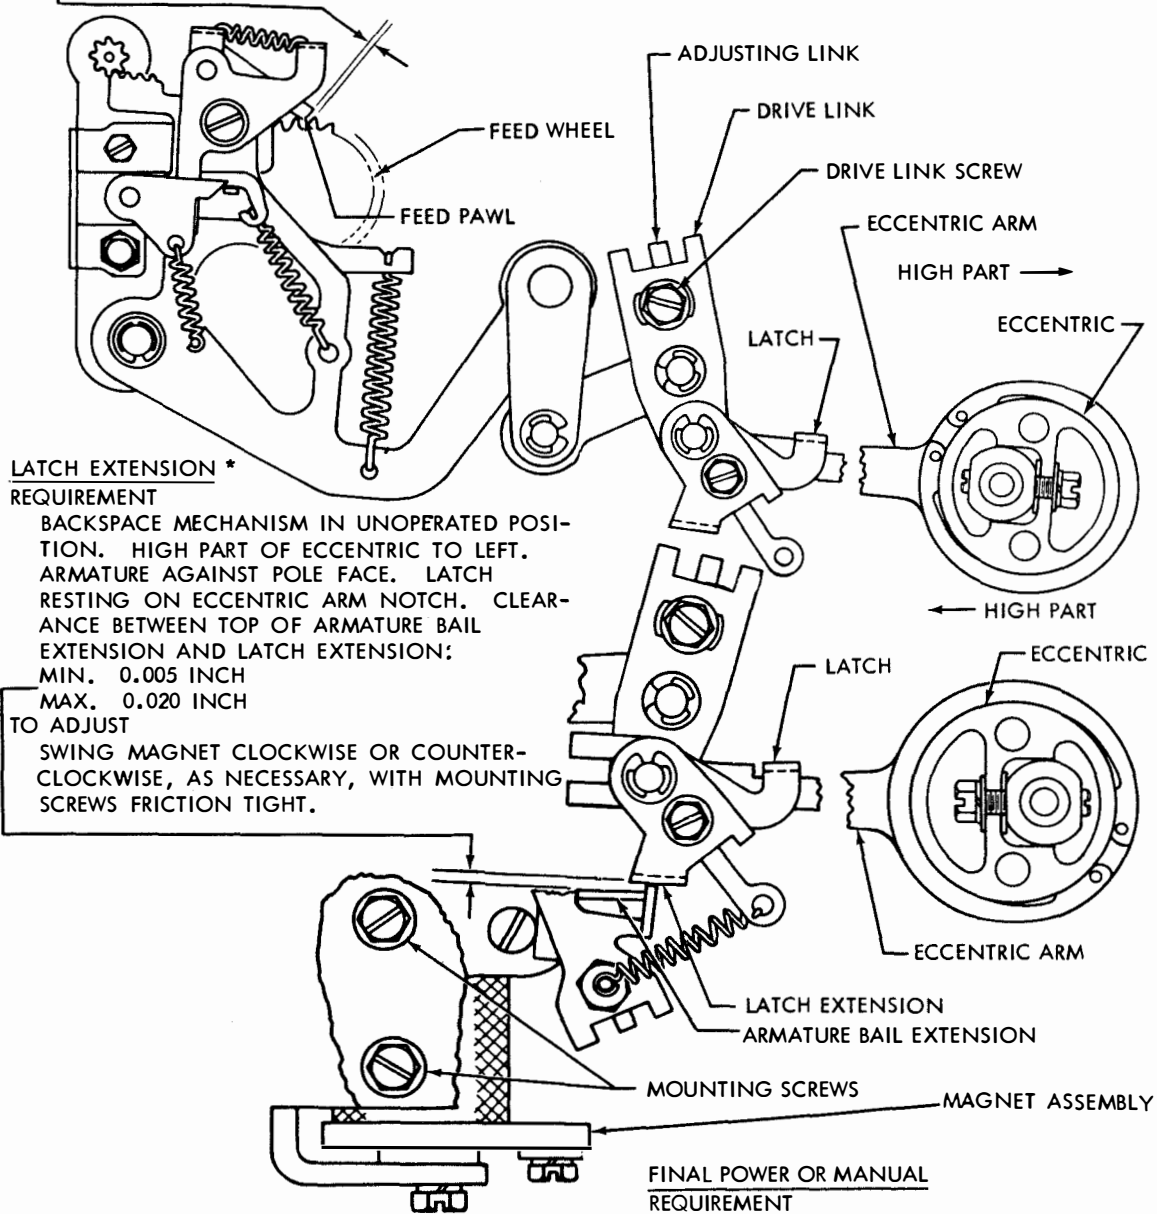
Power Drive Back Space Mechanism (For Chadless Tape)
